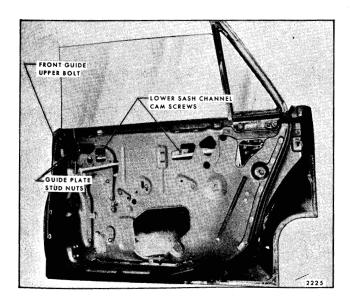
Rear Door Window Removal - 68069-68169 Styles
